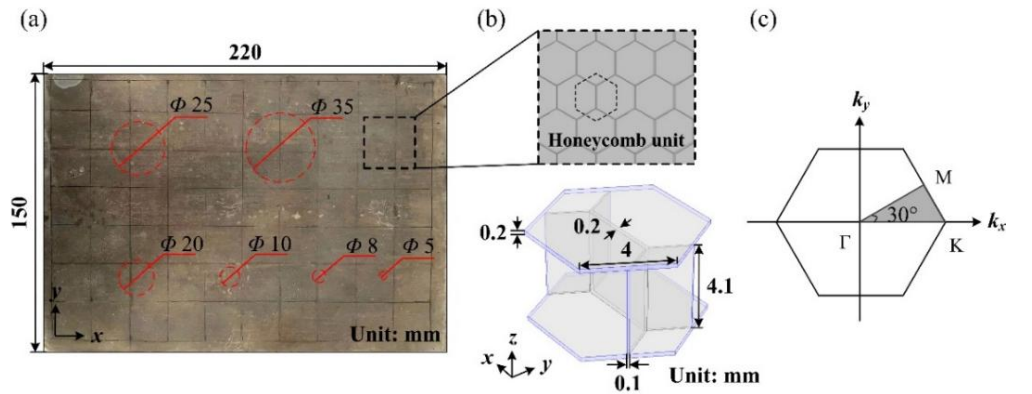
(a) The specimen; (b) Honeycomb unit; (c) The first irreducible Brillouin zone.
